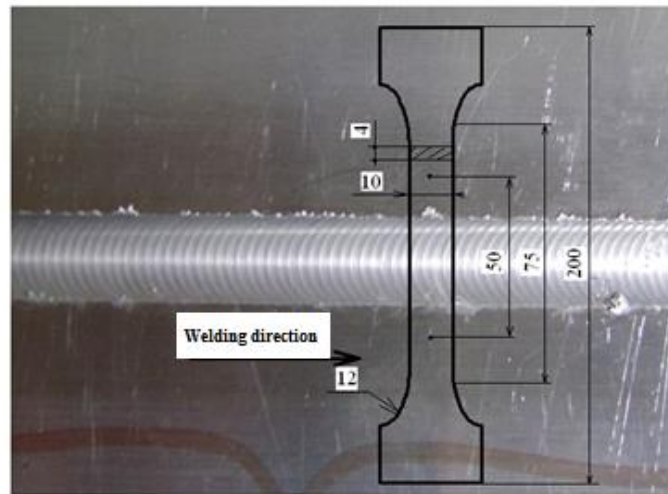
Example of welded joints obtained with different welding velocity:
